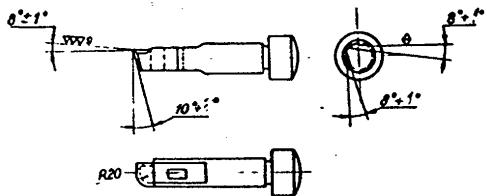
CUTTING TOOL GUIDE FOR BORING MASTERS ROD CRANKPIN END BUSHINGS
